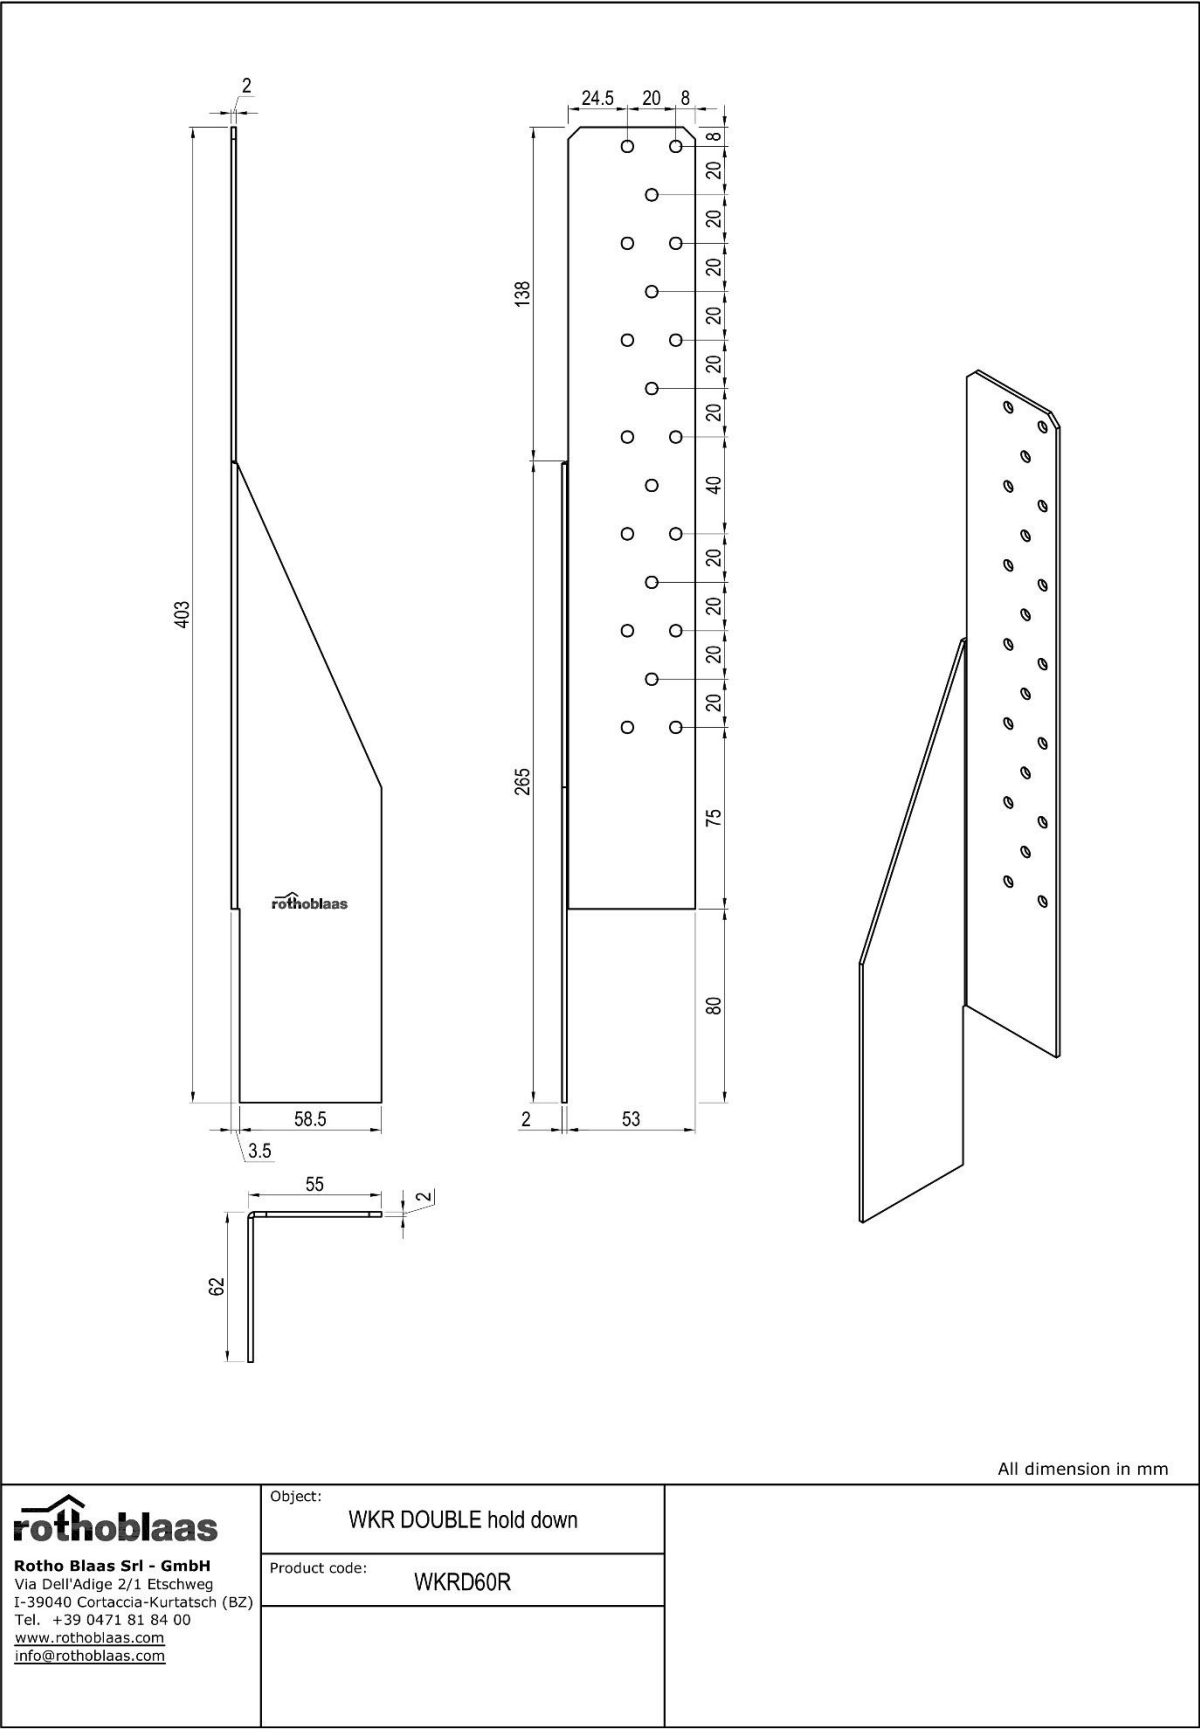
Dimensions of Rotho Blaas WKRD60R
